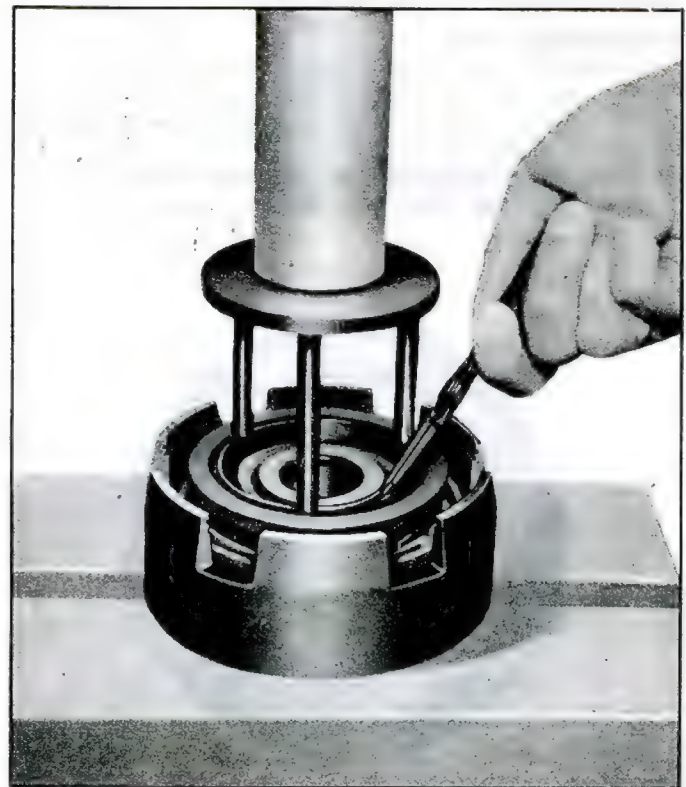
E-36—Removing Clutch Drum Spring Retainer with J-5133 and J-7782
